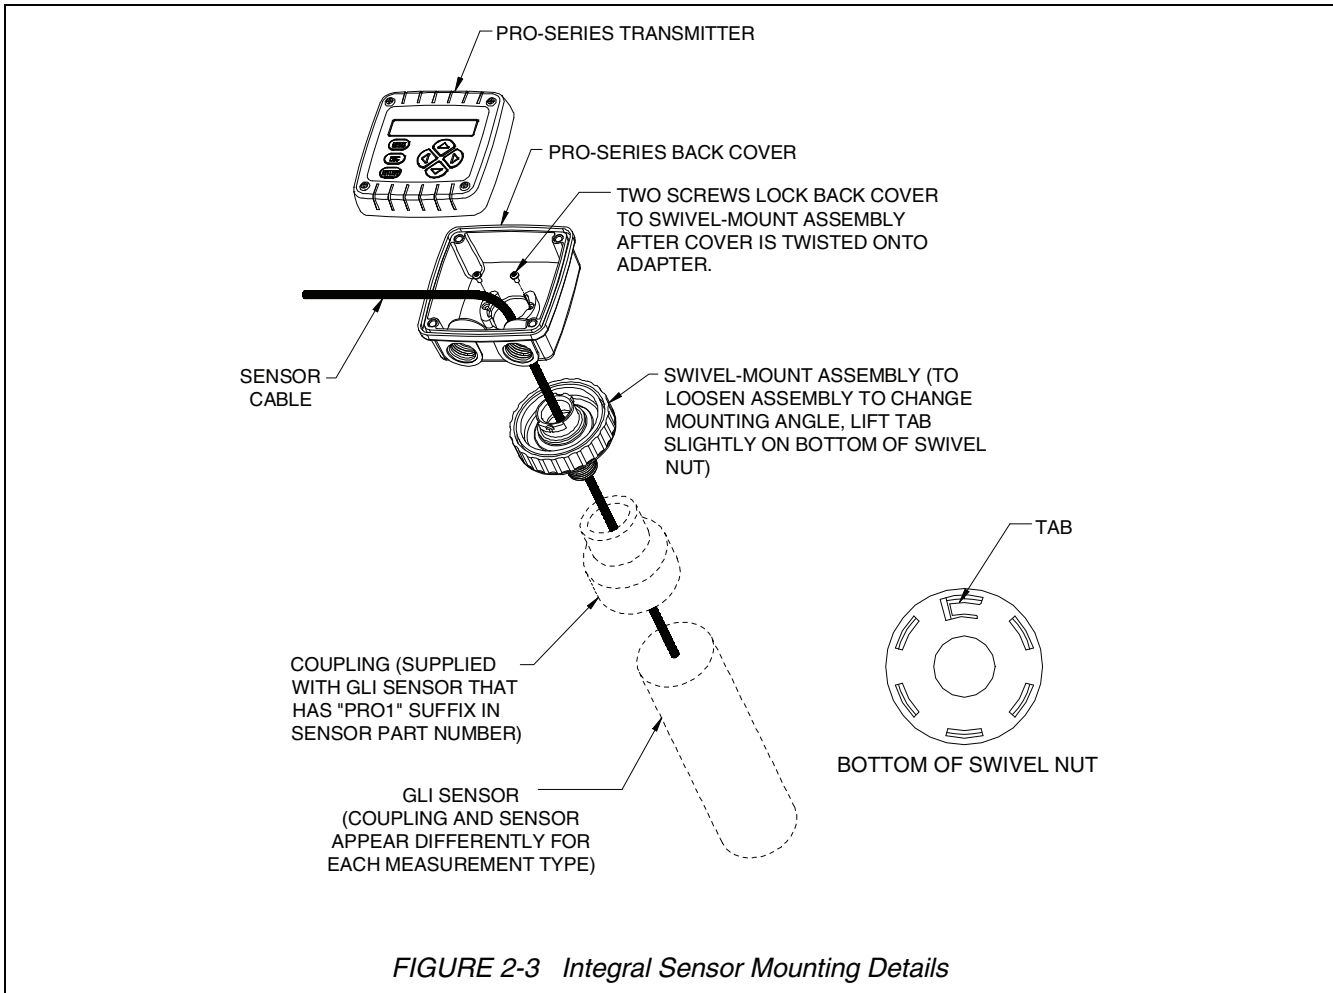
illustrates how to integrally mount the transmitter onto a sensor using the supplied GLI mounting hardware kit.
